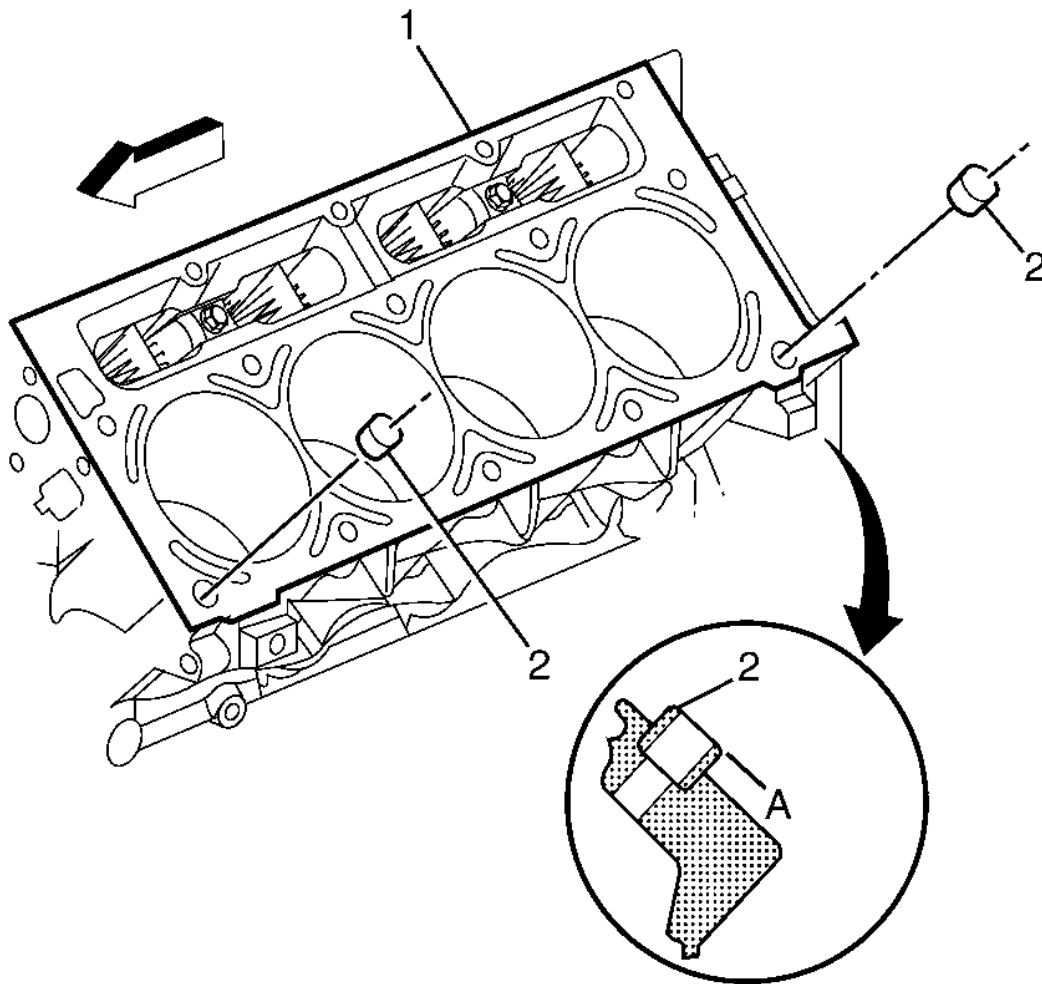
Identifying Cylinder Block & Locating Sleeves (Left Side)
